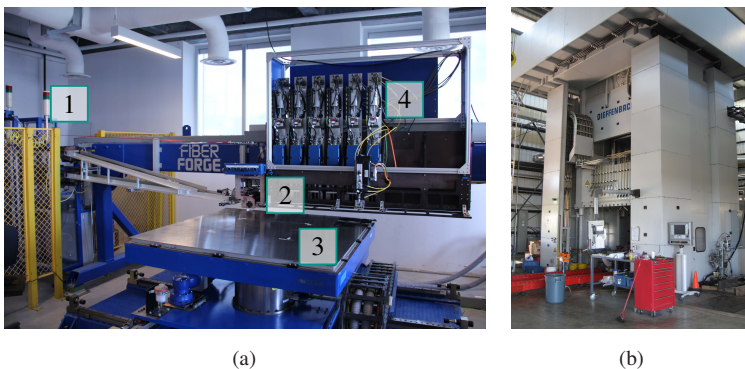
Thermoplastic tape laying and consolidation process: (a) ATL machine Fiberforge Relay 1000: 1. tape feeder, 2. cutting and laying unit, 3. movable and rotatable vacuum table, 4. spot welder array, (b) hydraulic press used for compression molding
